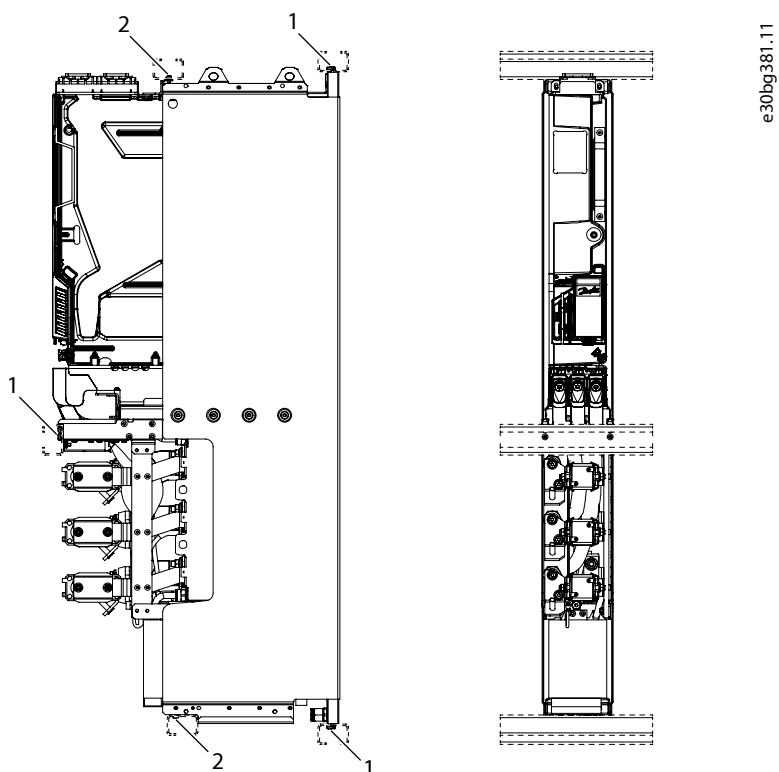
Mounting Holes of the System Module, AFE with the Integration Unit
